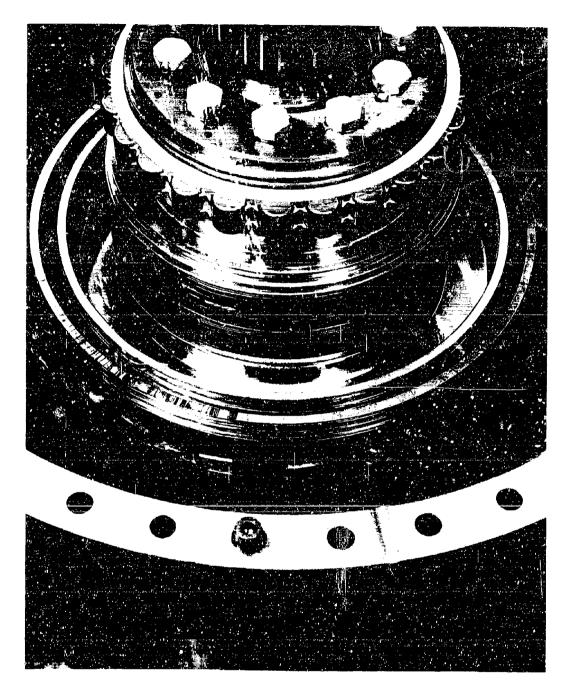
, JTF17A-20 No. 4 Compartment Shaft after Rig Test Showing Condition of Bearing, Carbon Seats and Labyrinth Seats
